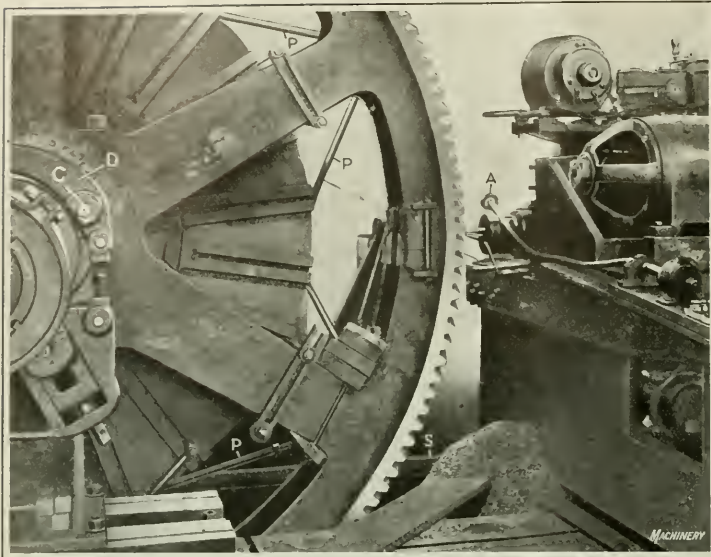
Opposite Side of Gear illustrated in Fig. 2, showing the End-mill and the Method of attaching the Gear to the Faceplate
